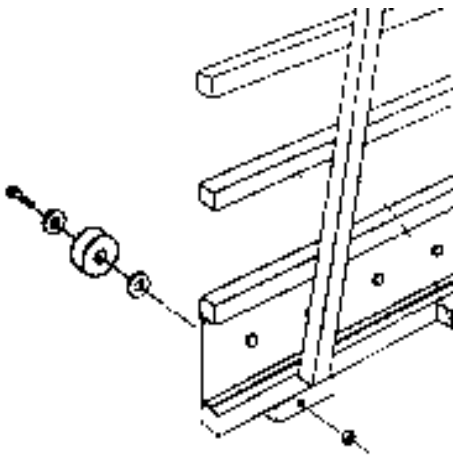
Installing the Wheels Accessory (viewed from rear of frame)
